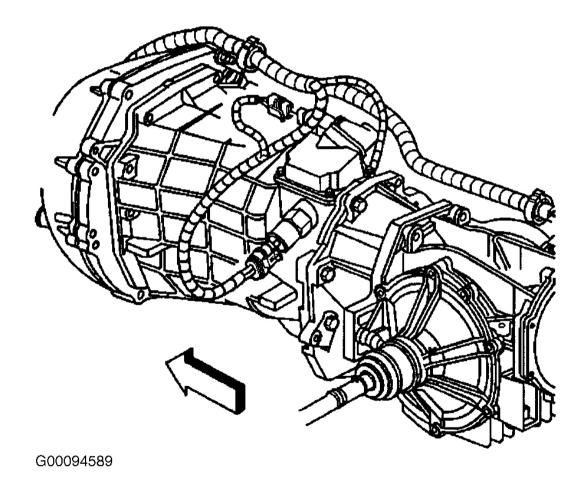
Identifying Reverse Lock-Out Solenoid Courtesy of GENERAL MOTORS CORP.
